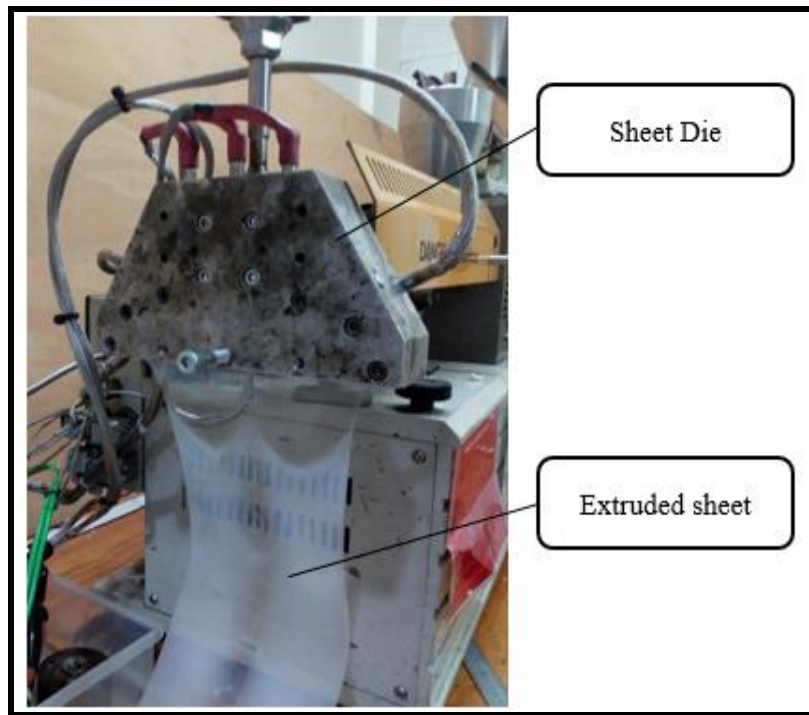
Blending PP and MAPP as sheets using a ThermoPrism TSE-16-TC twin screw extruder.
